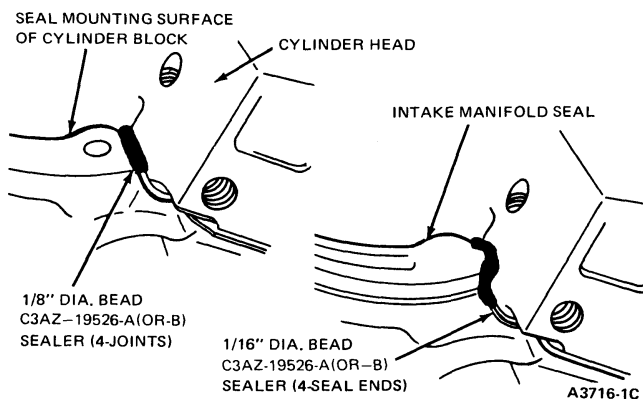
Typical RTV Sealer Installation—Intake Manifold
